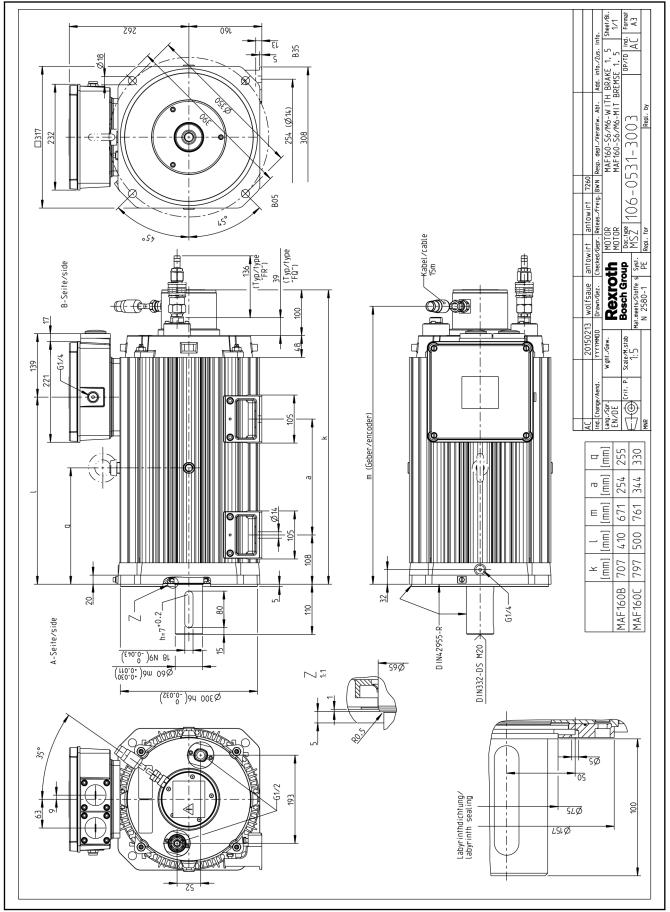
MAF160 with encoder M6/S6 and brake 1/5
